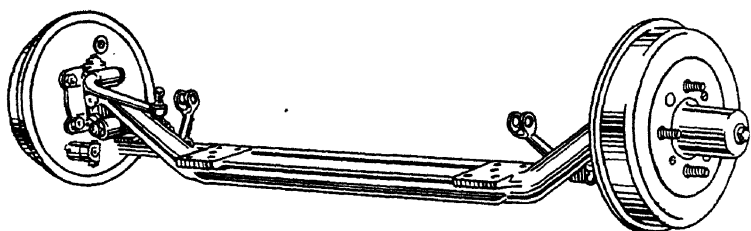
Front Axle Designed for Taking Braking Stresses.
